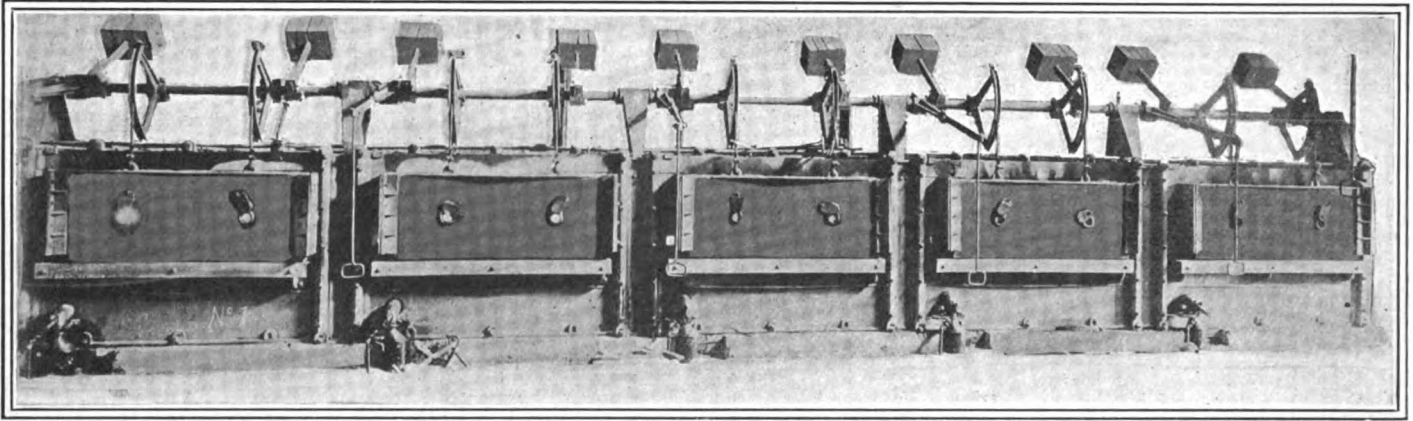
View of the five new casehardening furnaces installed at Warner plant at Toledo
